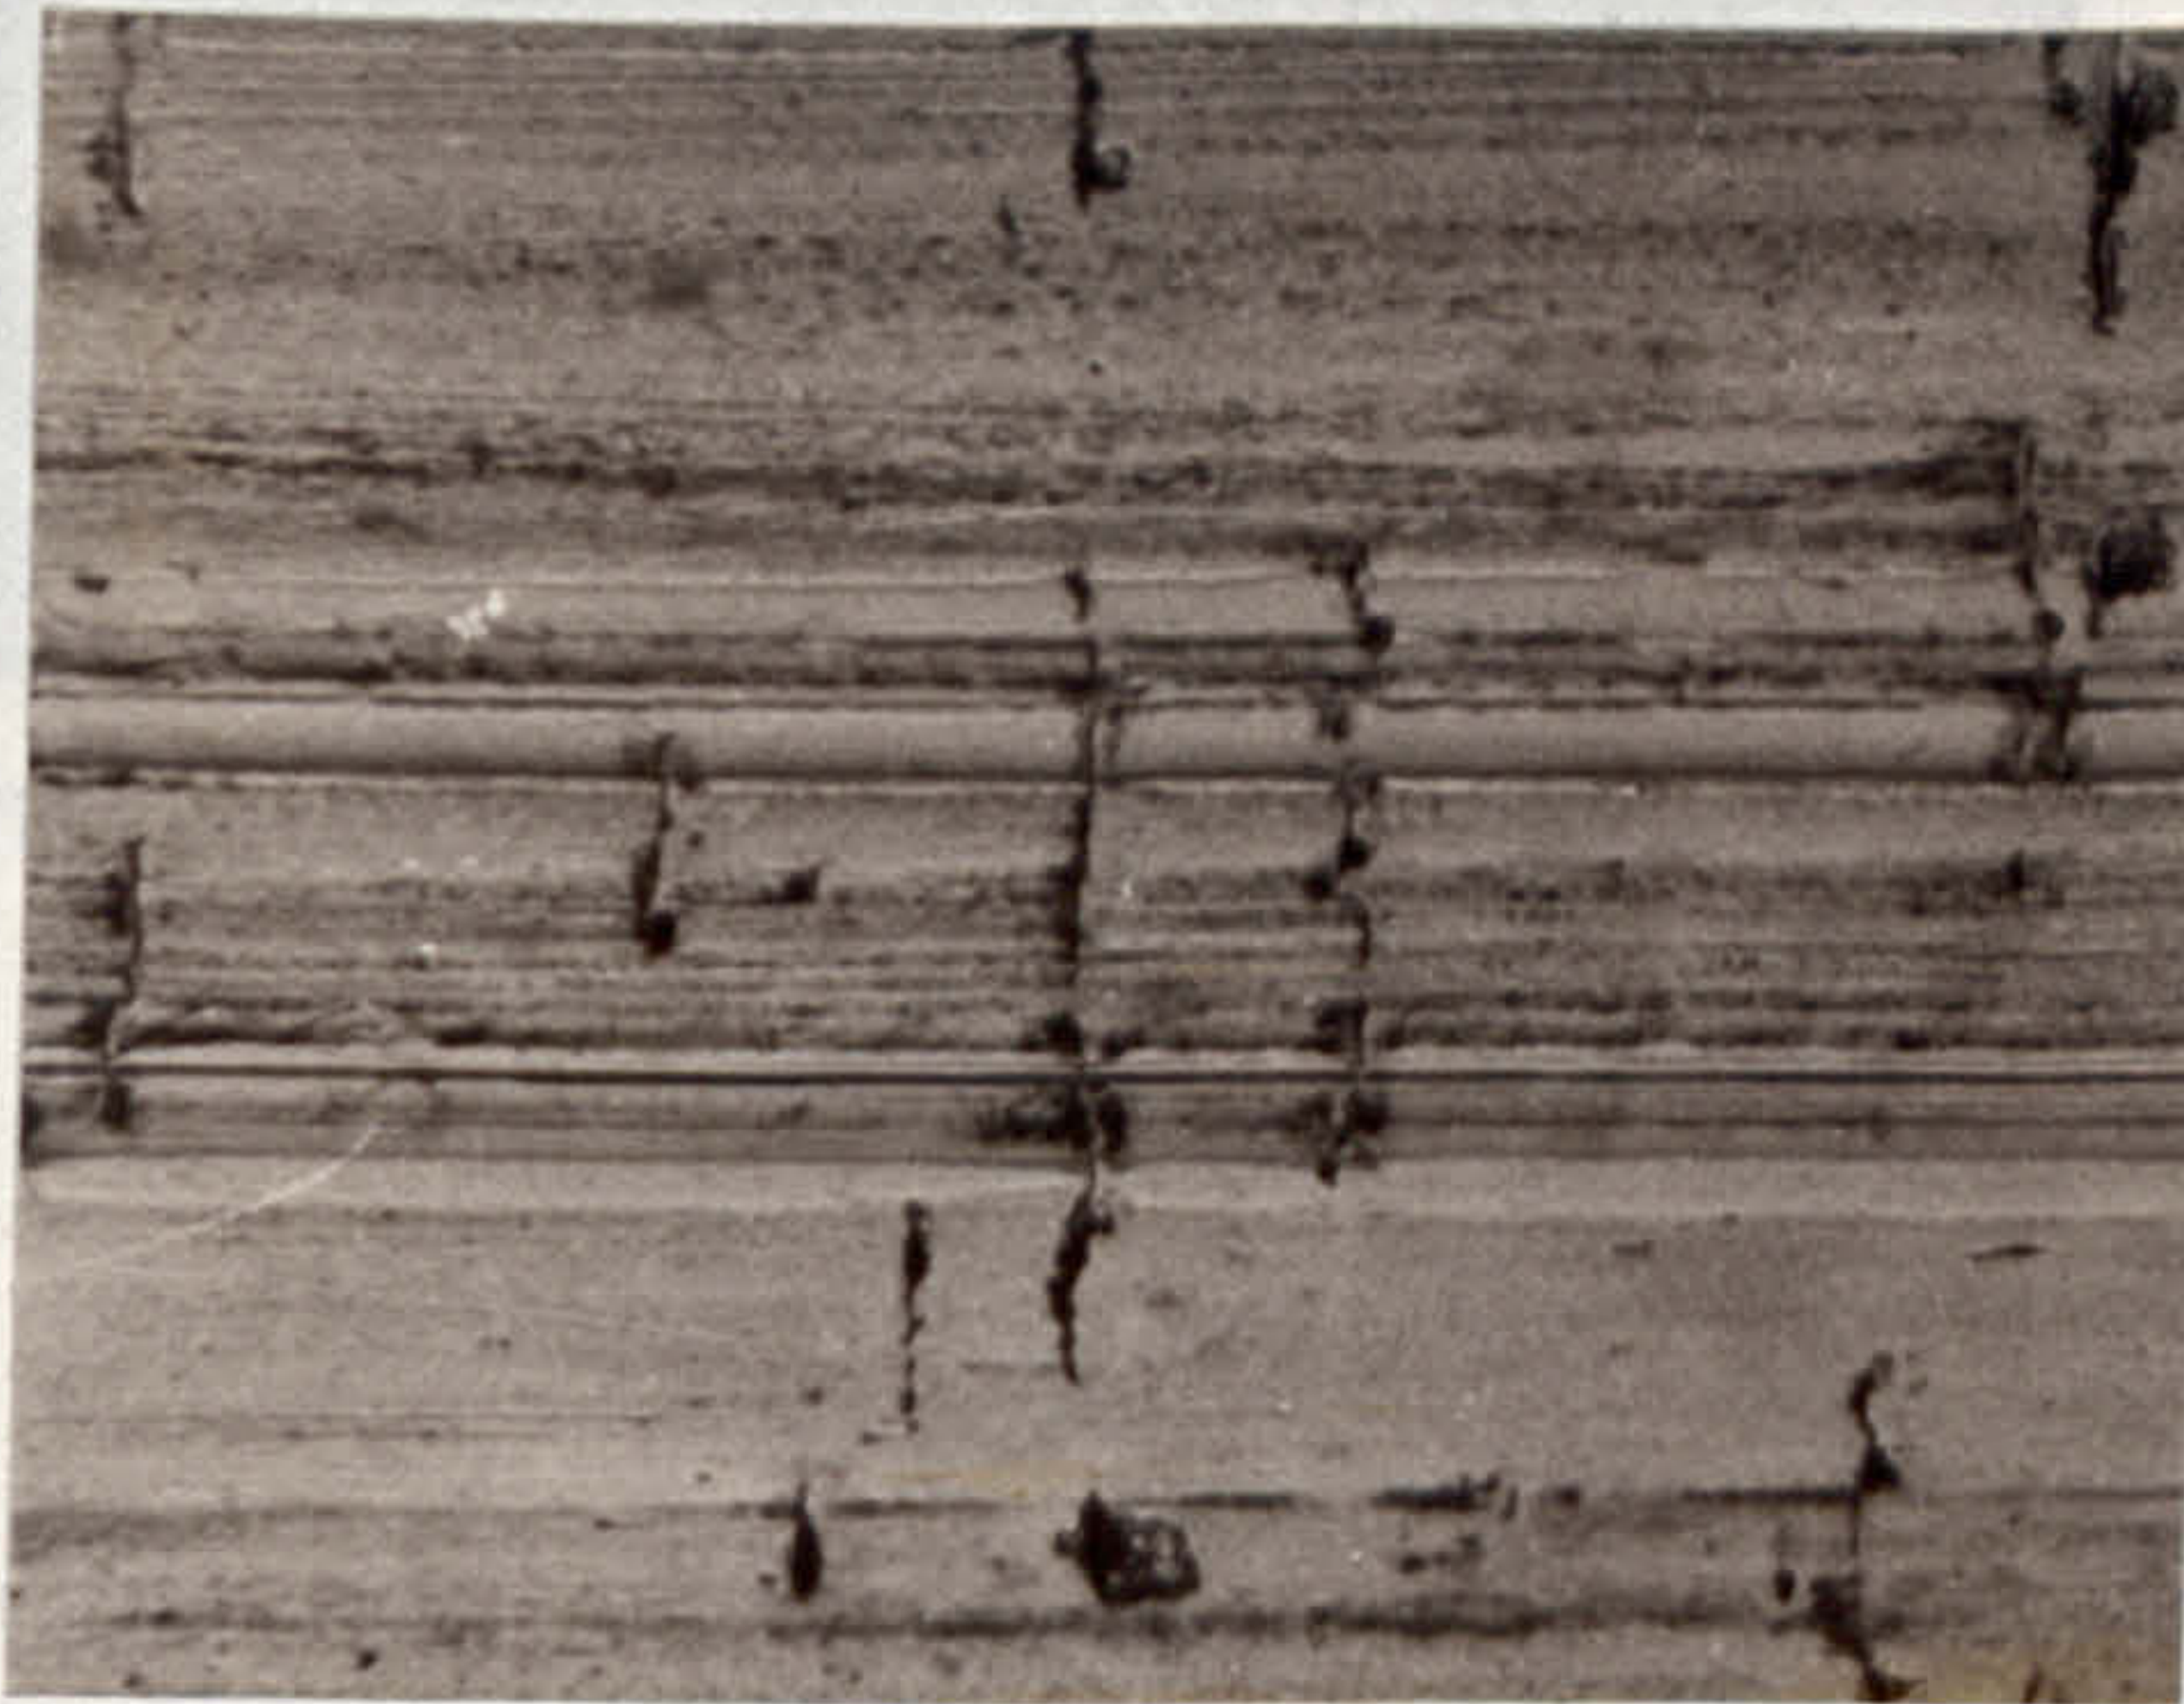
TEST 1A, CAM WEAR SURFACE OPTICAL.
